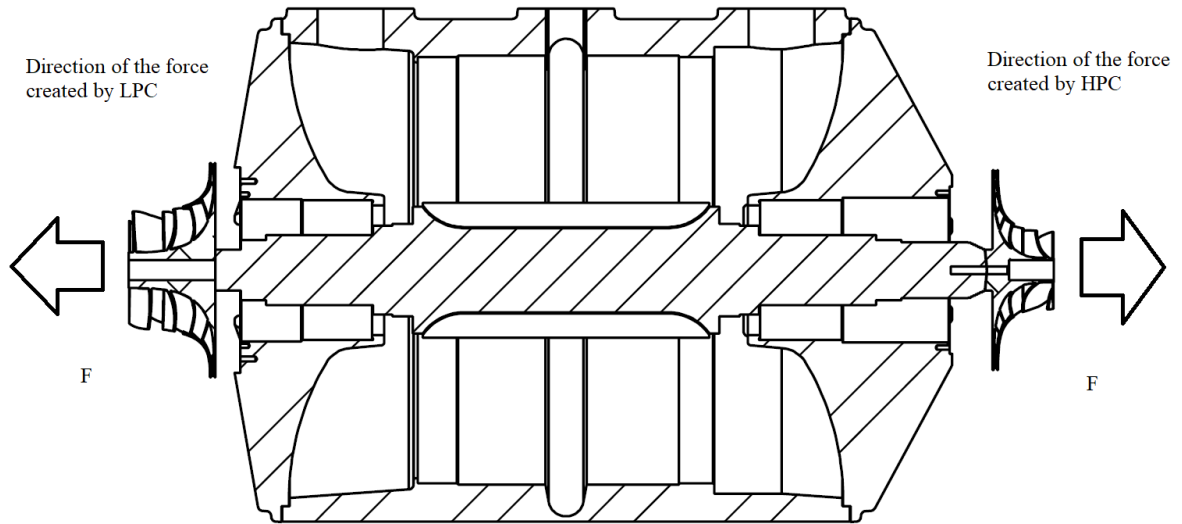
Cross-section view of the motor-compressor configuration with two impellers.
